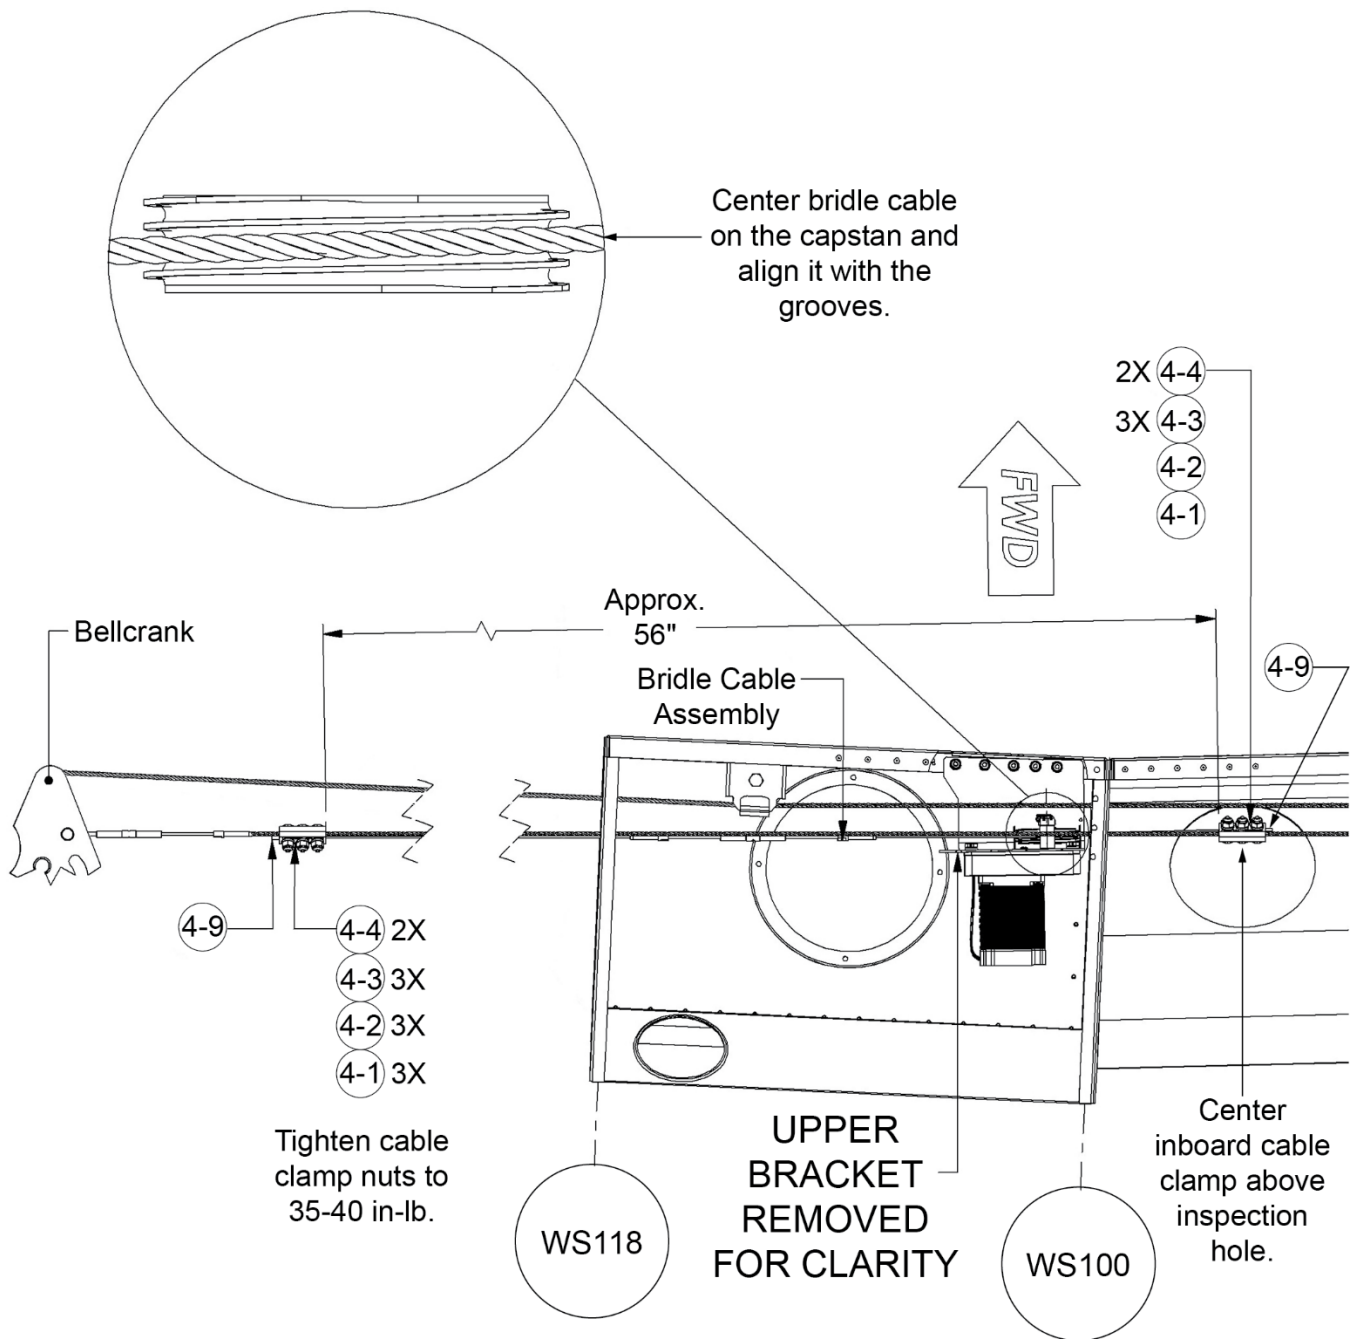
Connecting Bridle Cable to Aileron Crossover Cable
